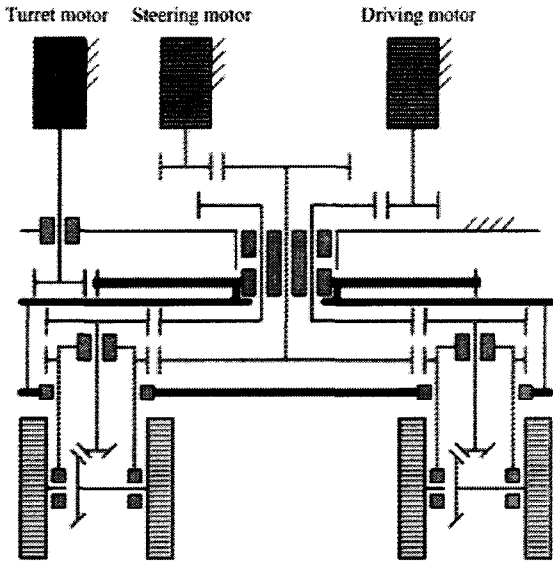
Gear position diagram of a synchro drive mobile robot base
